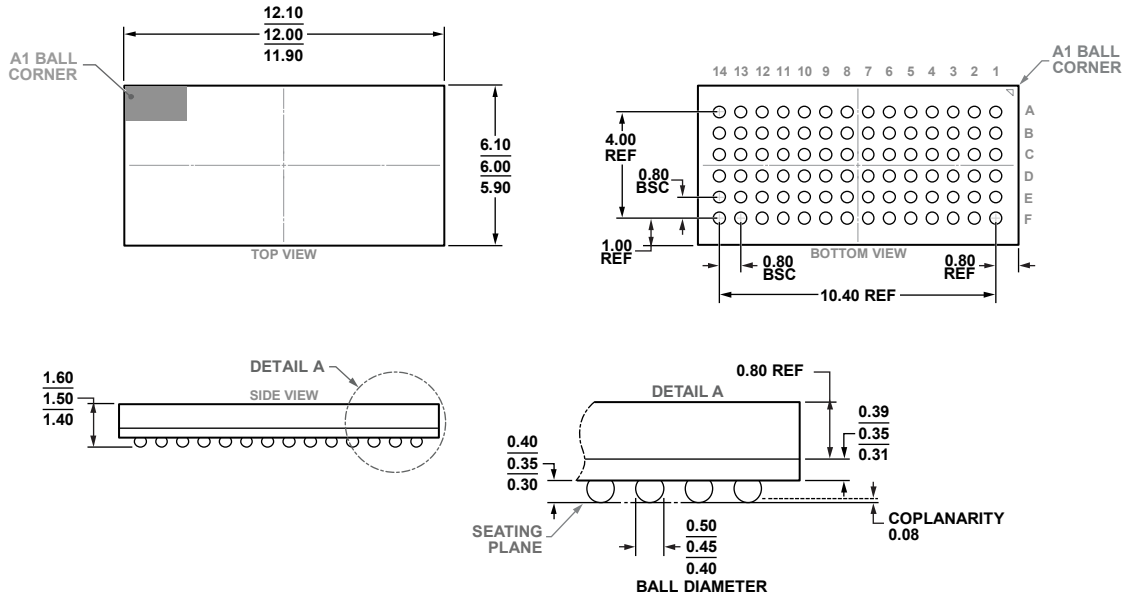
84-Ball Chip Scale Package Ball Grid Array [CSP\_BGA] (BC-84-4)
